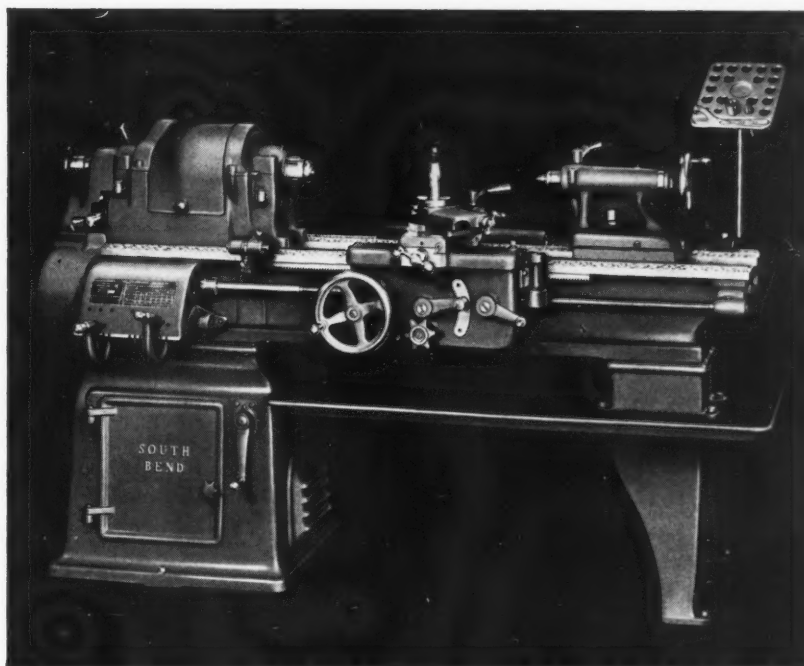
South Bend 16-inch lathe with improved double-tumbler quick-change gear-box
